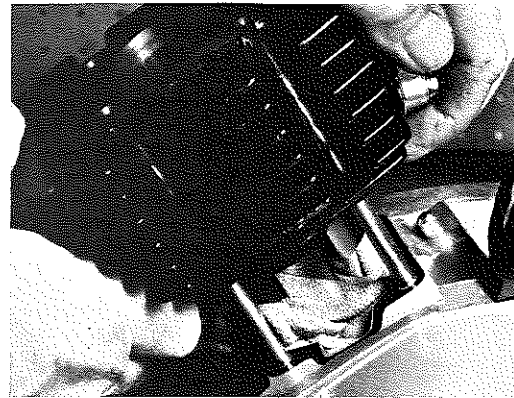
Removing cylinder (note cloth tucked underneath piston).
